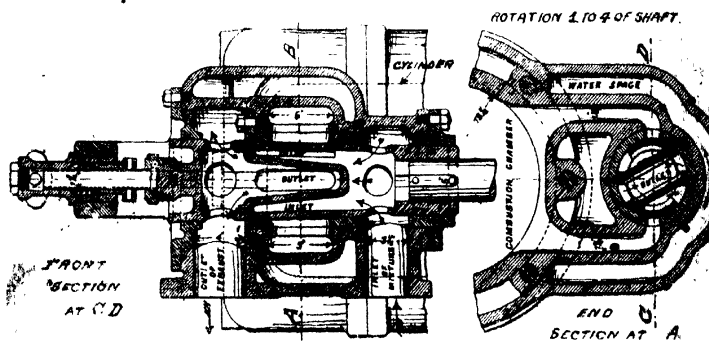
Butler combined admission and exhaust rotary valve for horizontal gas or oil engine with 13½-in. diam. cylinder.
